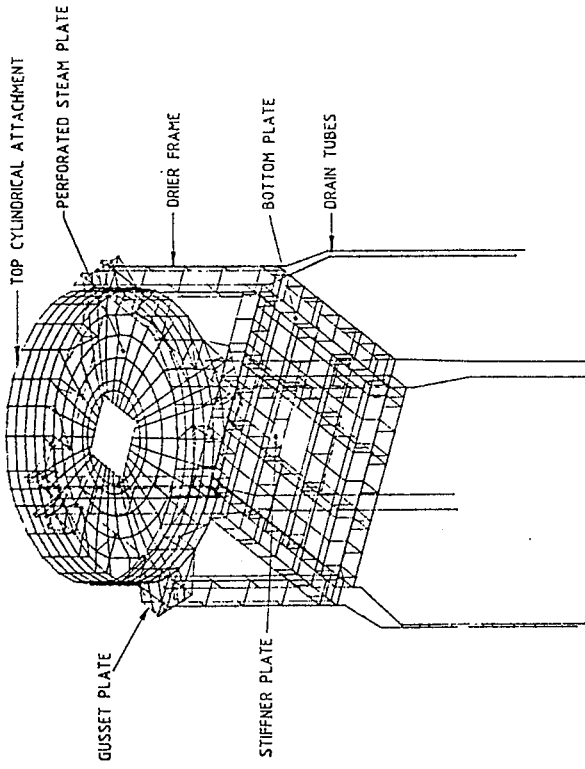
FINITE ELEMENT MESH OF STEAM DRIER ASSEMBLY
